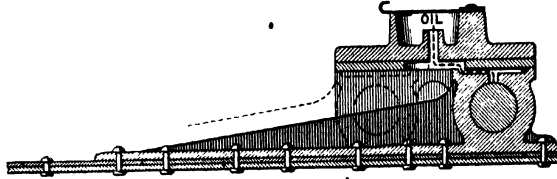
DETAILS OF KNIFE HEAD AND CONNECTION. [Harrison, McGregor.]
